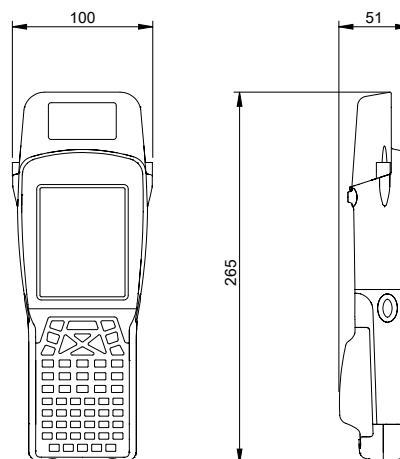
Dimensions BIS M-871-1-0__X-001 (in mm)
